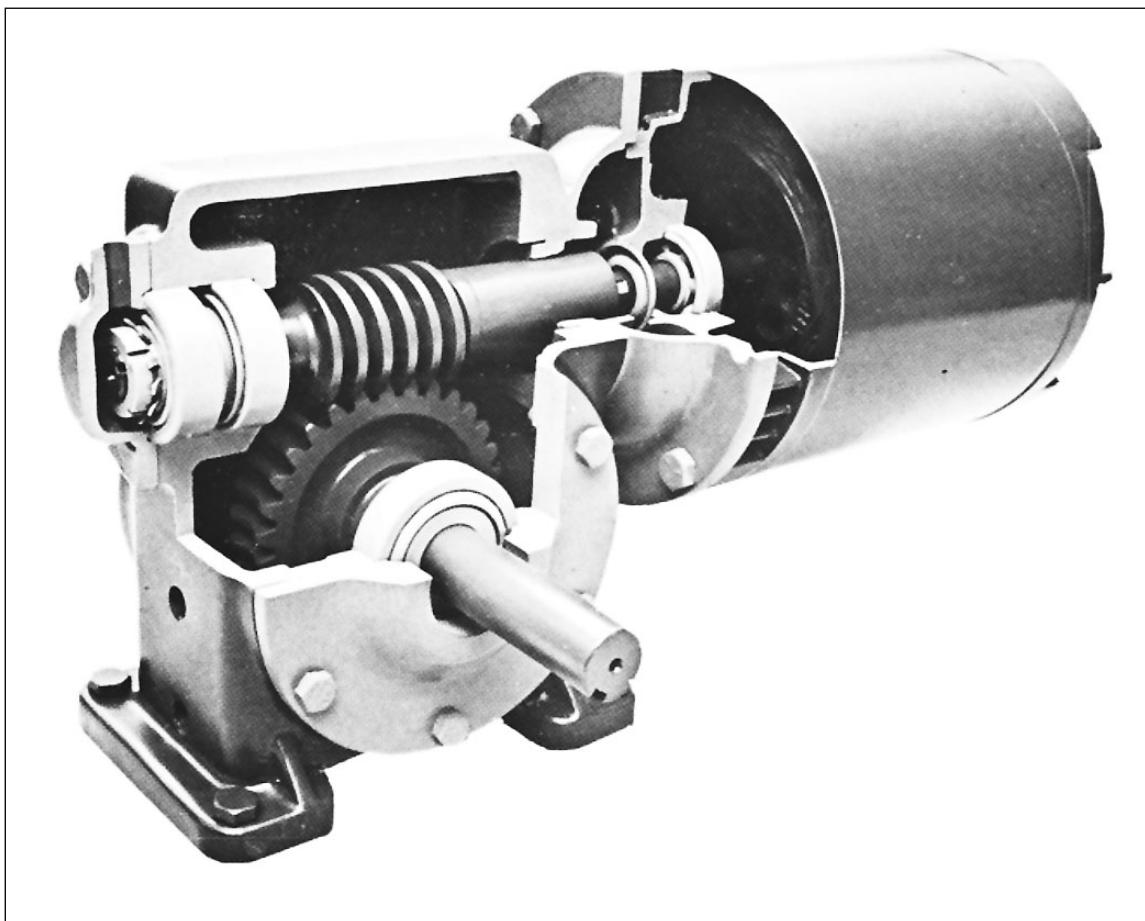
Gear motor. (Winsmith Div., UMC Industries)
